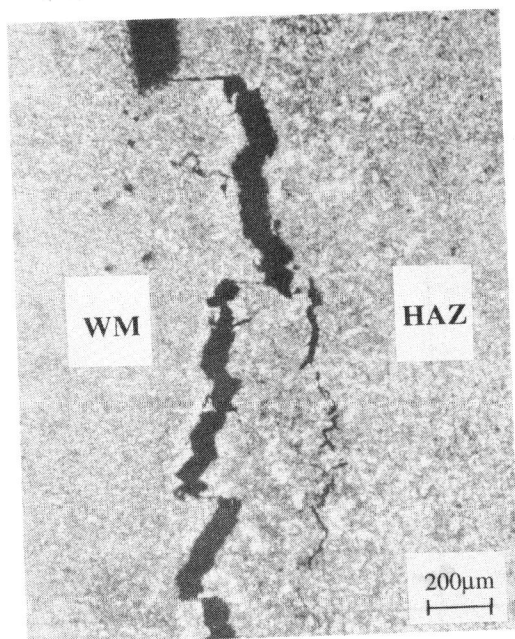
Fatigue crack tip in the overmatched weld metal but brittle fracture initiates and remains at the CGHAZ during the CTOD test
